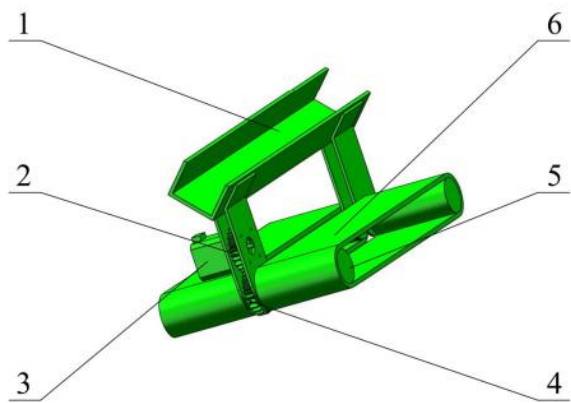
Height-adjustable stacking crop platen device, used to compact and support bundles at different heights according to crop load and stack thickness. Numbered components: (1) pressboard drive motor; (2) housing; (3) adjustable pin; and (4) pressure plate.
